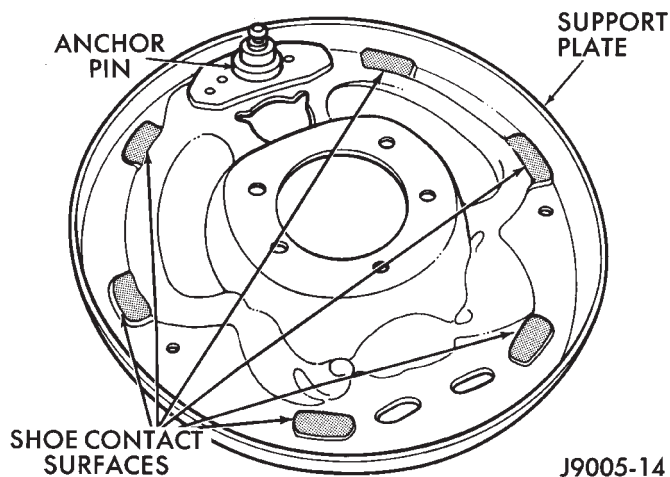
Shoe Contact Surfaces (9-Inch Support Plate)
